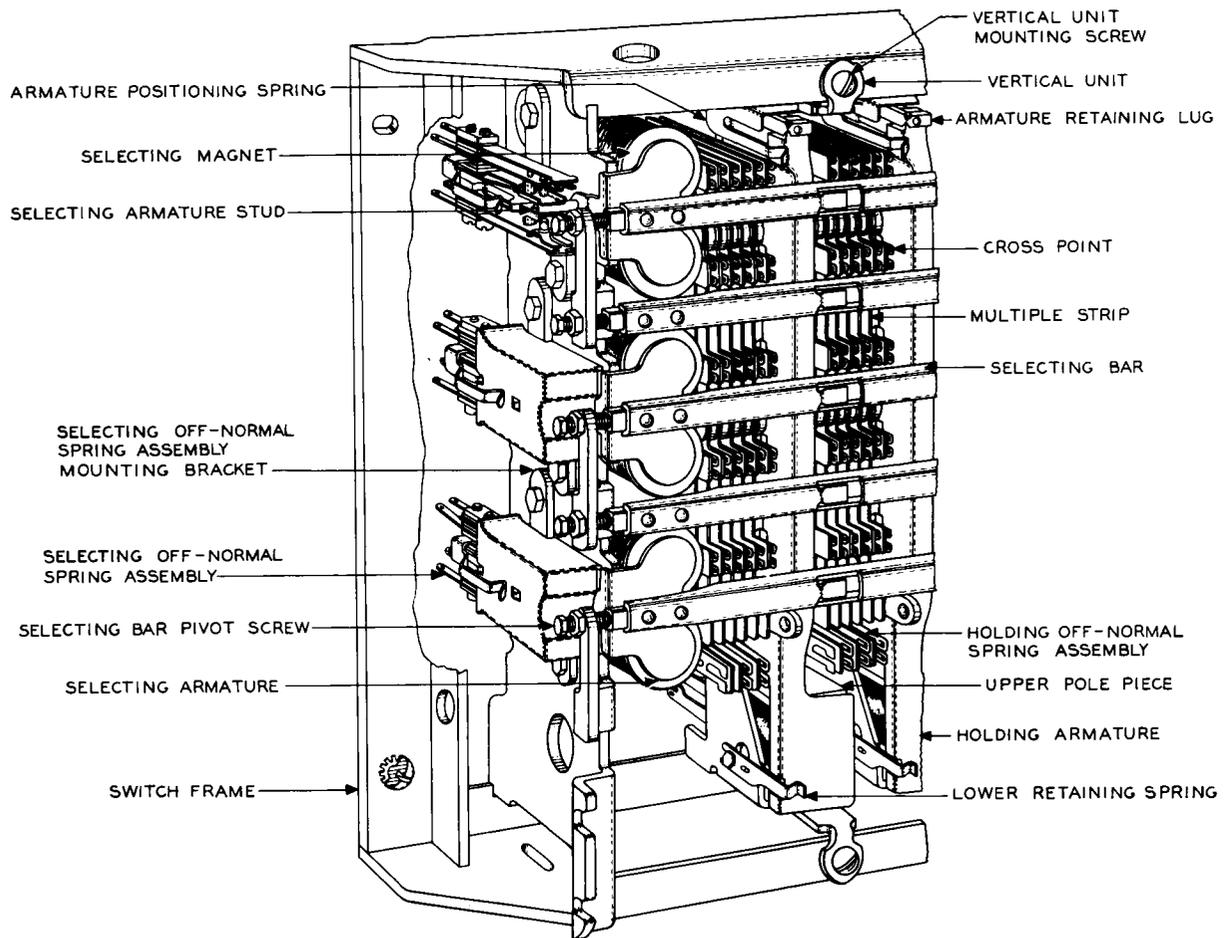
Fig. B — General View of Switch Equipped With Vertical Units Having Armature Retaining Lug
